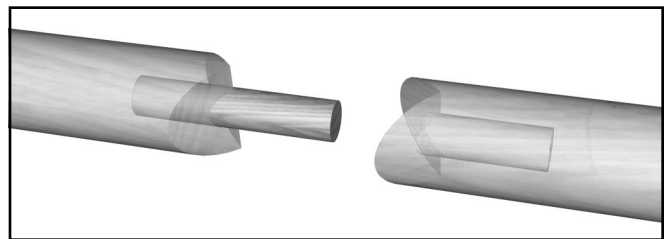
Close-up view of the dowel-splicing method. One dowel is notched, and the other is cut in a wedge shape to fit into the notch. Before this is done, both ends are drilled to accept a small piece of dowel ($\frac{1}{4}$ inch), which is glued into one of the ends. The large dowels should both be weatherproofed before splicing.
